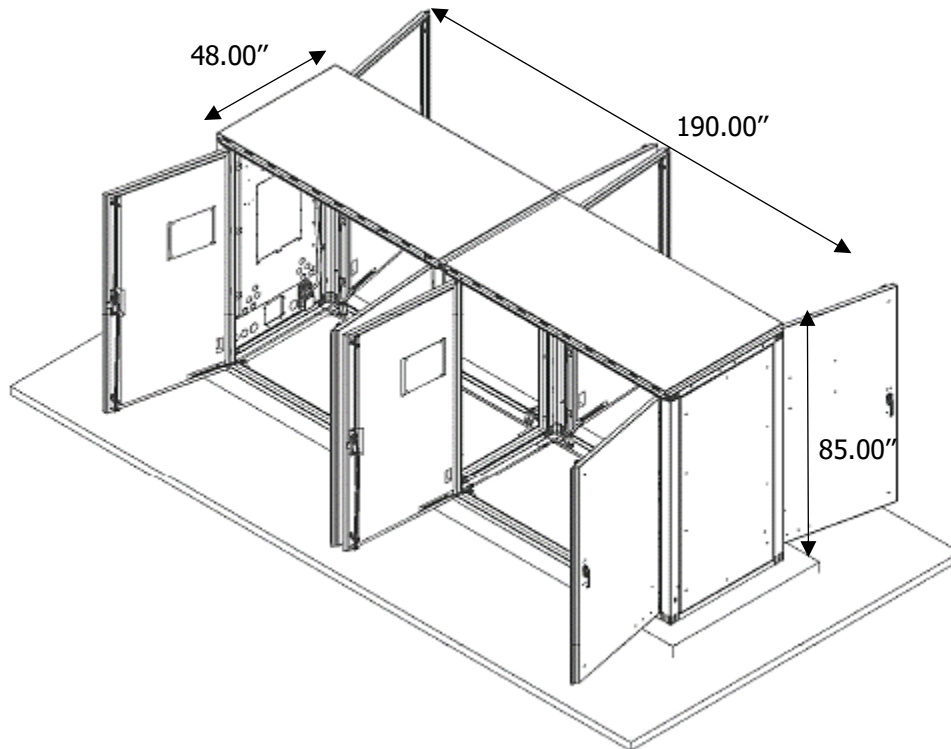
Drawing of the general appearance of the two-bay enclosure.
